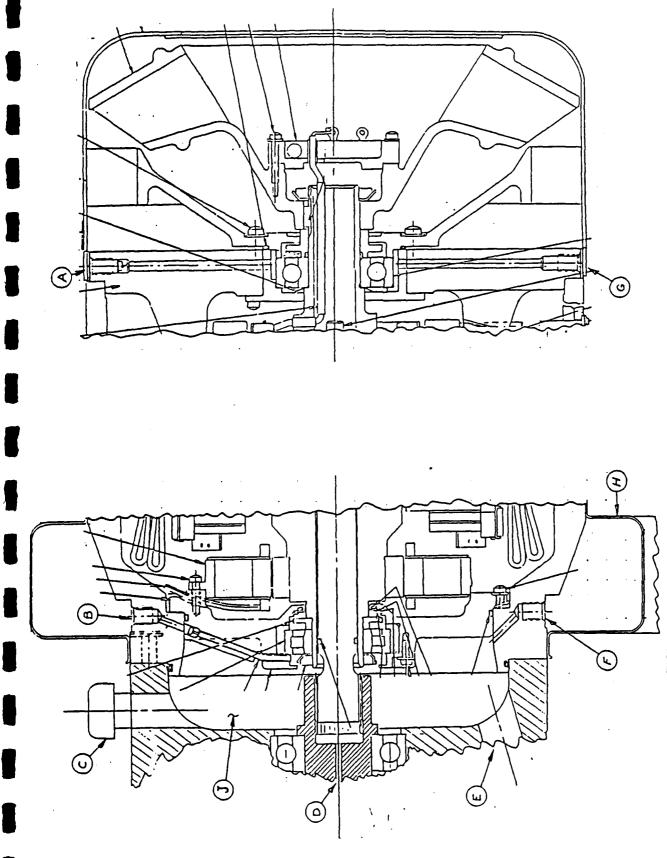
ALTERNATOR / GEARBOX / TYPICAL INSTALLATION
